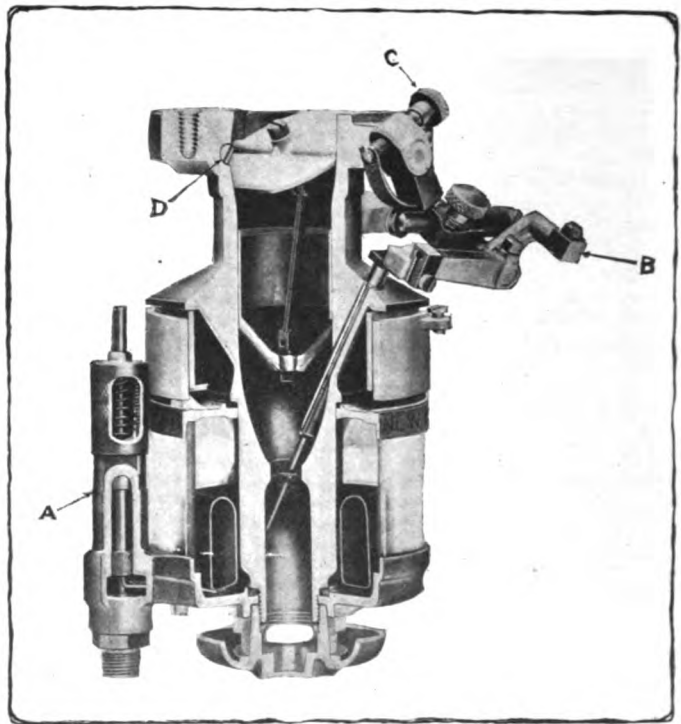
Quarter section through the New-Miller carbureter showing construction
